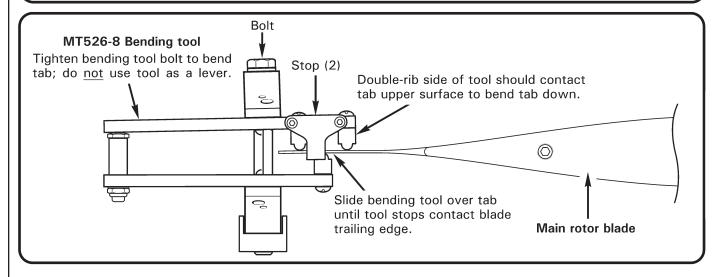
MAIN ROTOR BLADE TRIM TAB
